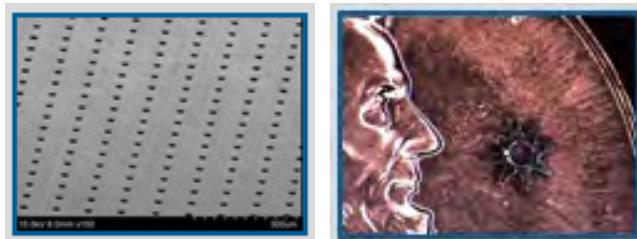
Examples of Parts Fabricated with Laser Micromachining
